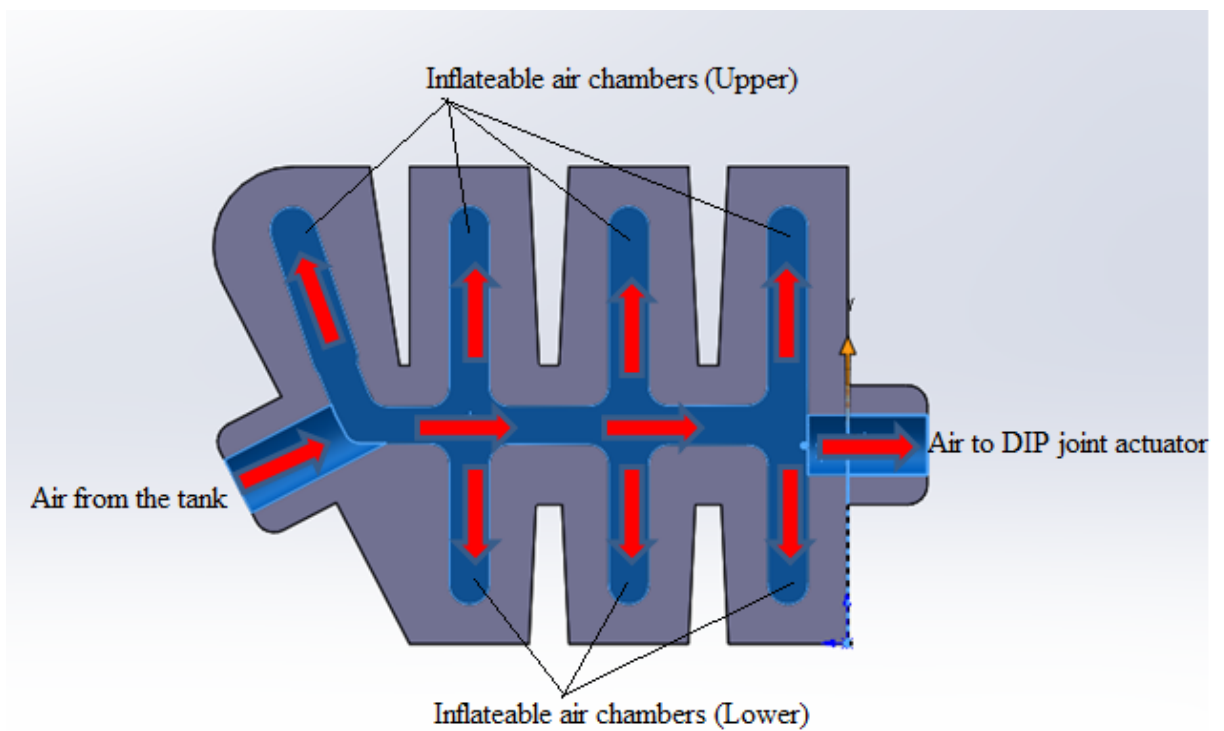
The cross-section view of PIP joint rotary actuator in the HE
